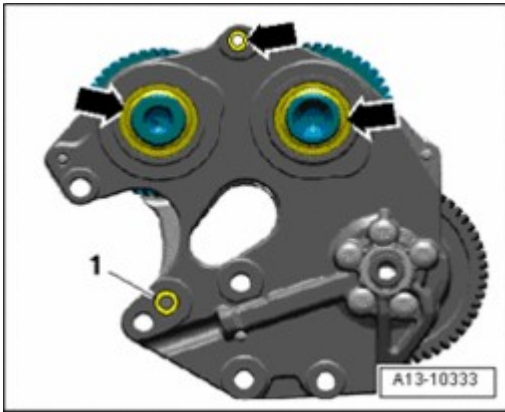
Applying Sealant Beads To Clean Sealing Surfaces Of Spur Gear Unit
